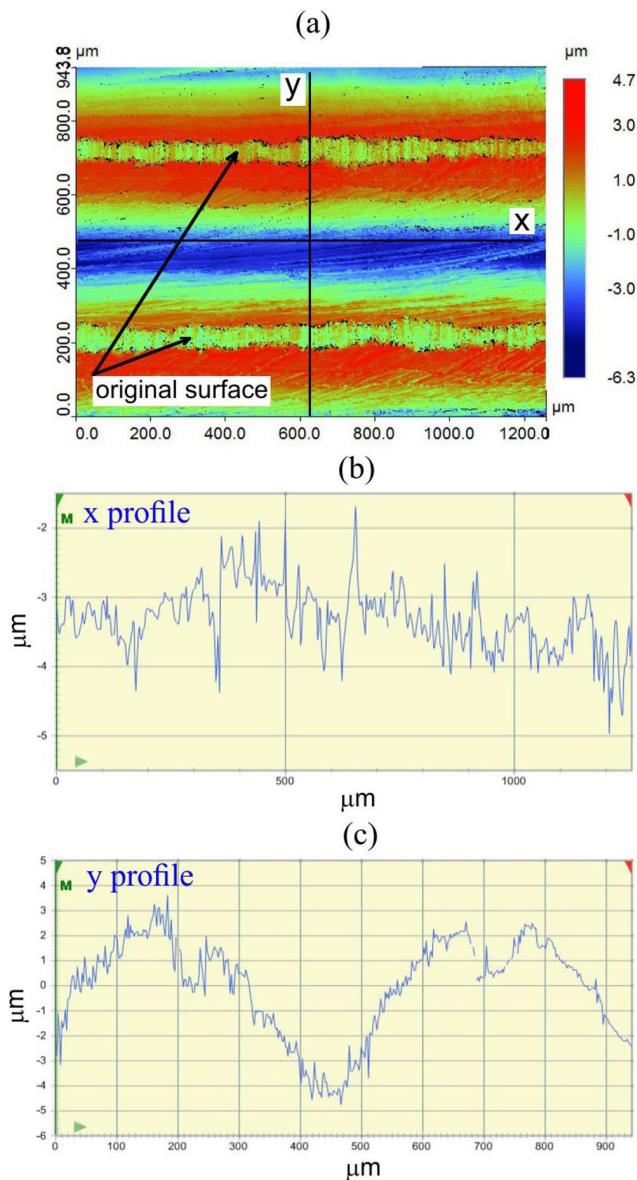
Surface morphology of the specimen: (a) sheet after forming at bottom of the rib formed at parameters of T1 test with spiral strategy, (b) and (c) are directional profiles of the surface topography
